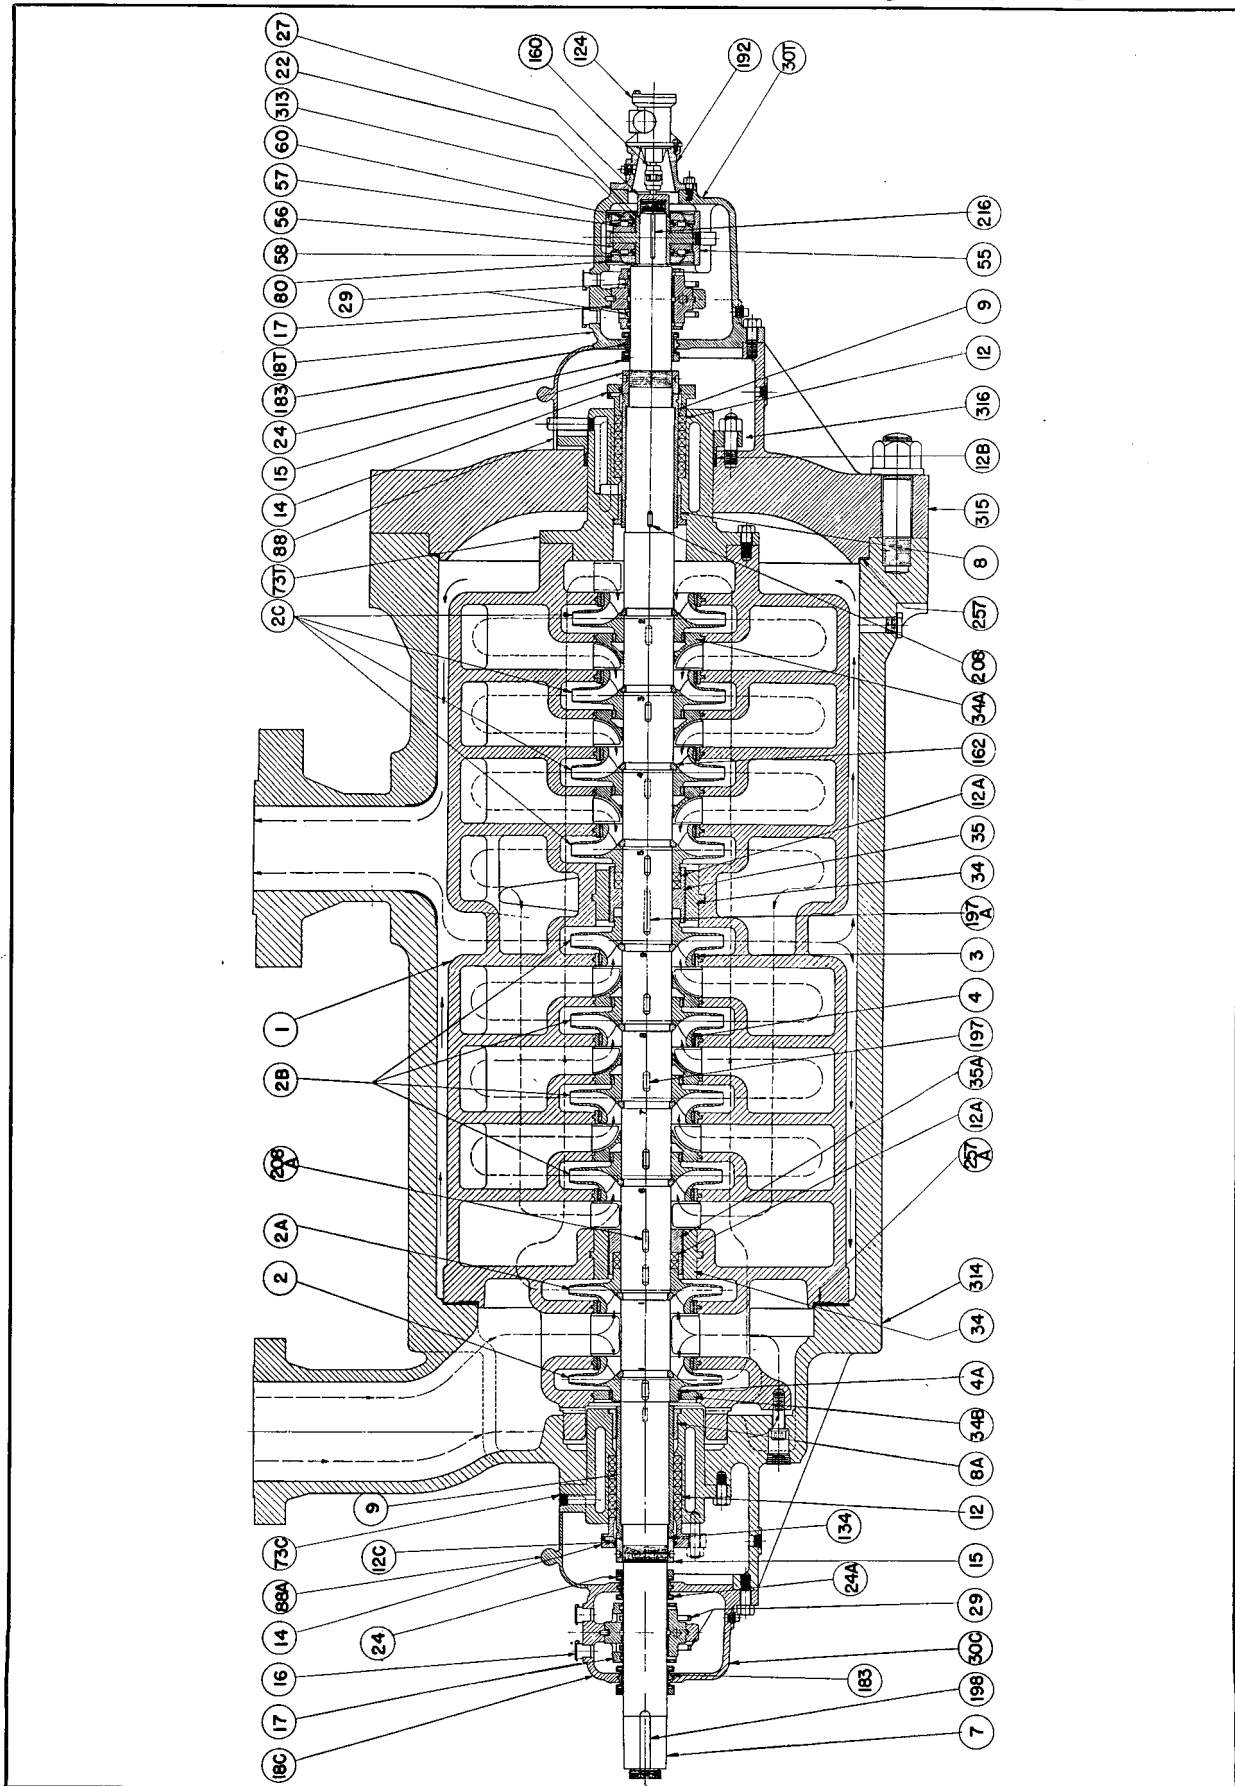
Barrel type pump with oil lubricated sleeve and Kingsbury type thrust bearings.
